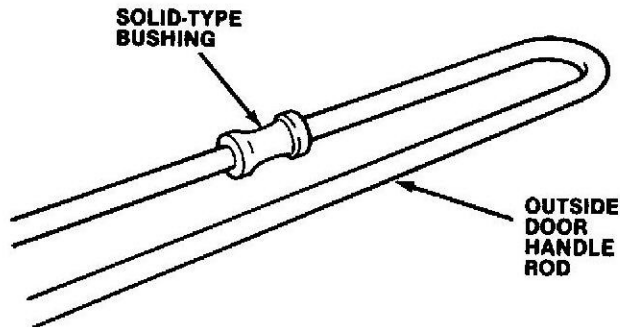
Outside Door Handle Rod and Bushing Inspection
